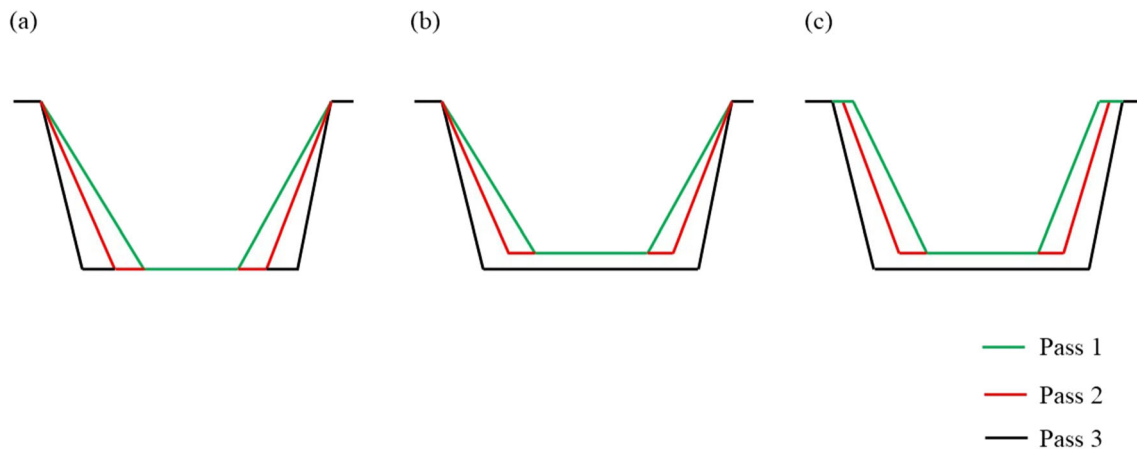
Vertical view showing of the intermediate shapes of a design B, b design B+C, and c design A+B+C
